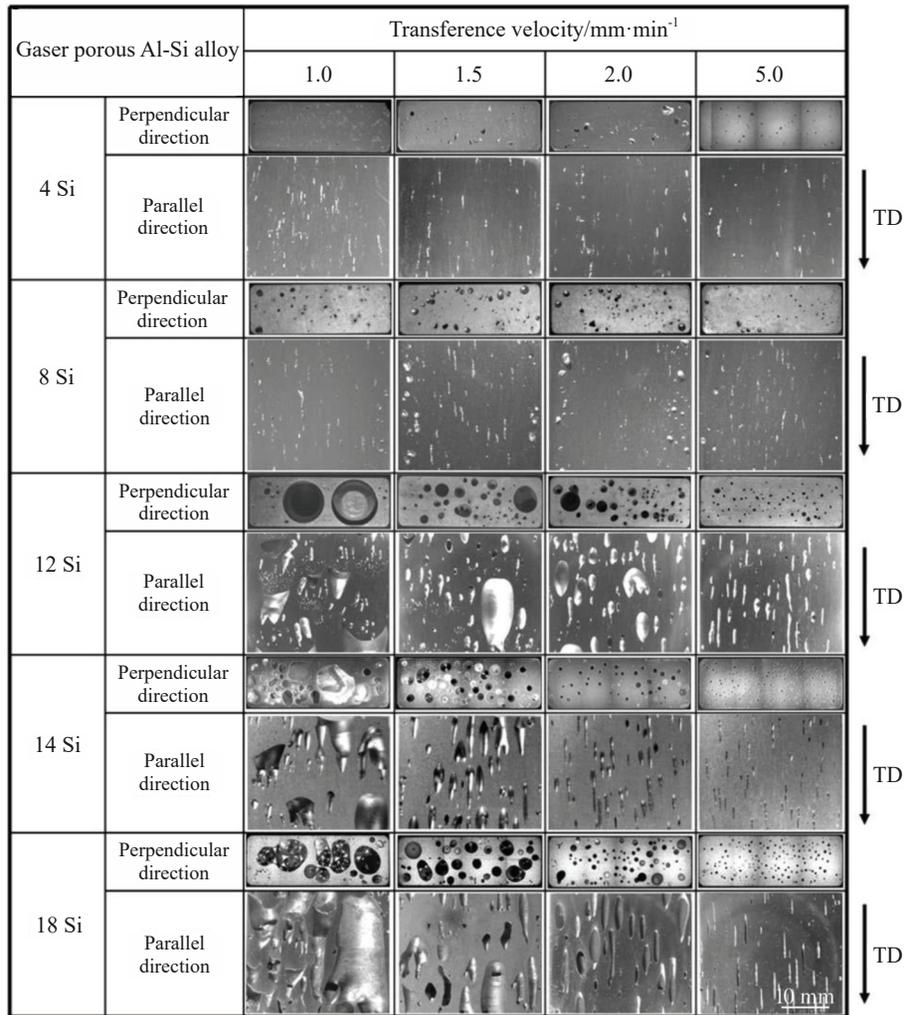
Specimens of Gasar porous Al-Si alloys fabricated by the continuous casting technology^[20]
